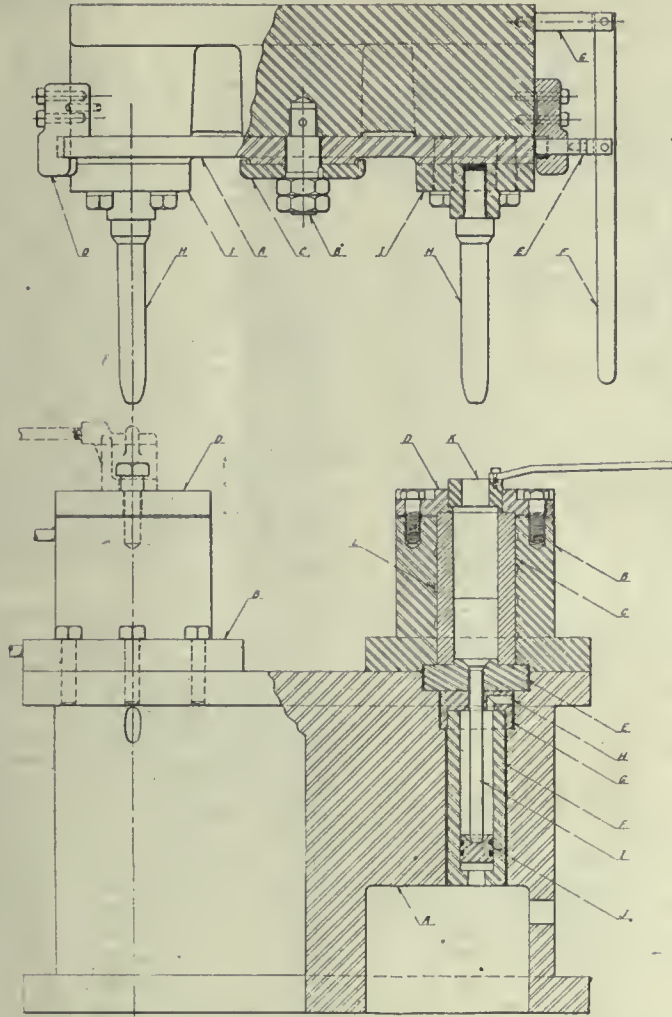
ASSEMBLY OF TOOLING FOR FIRST FORGING OPERATION.
